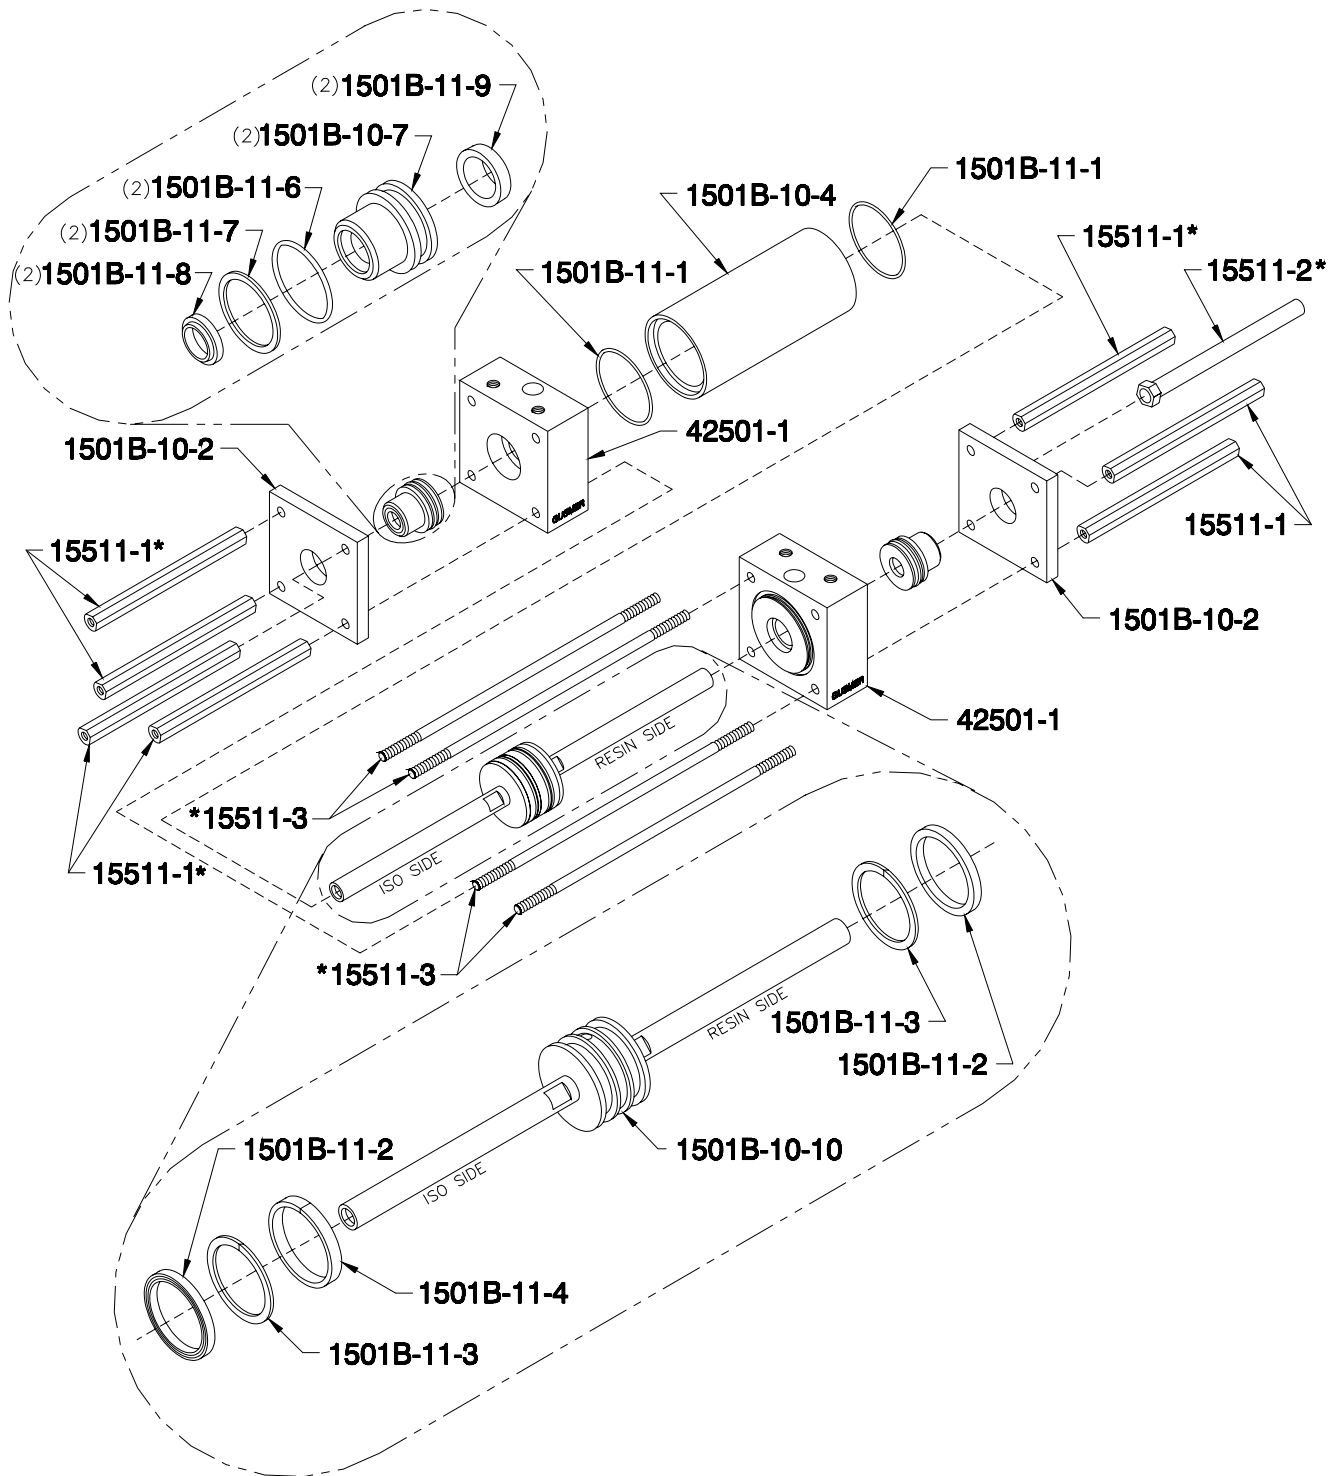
Hydraulic Cylinder with Spacers (Part No. 42511), Exploded View
